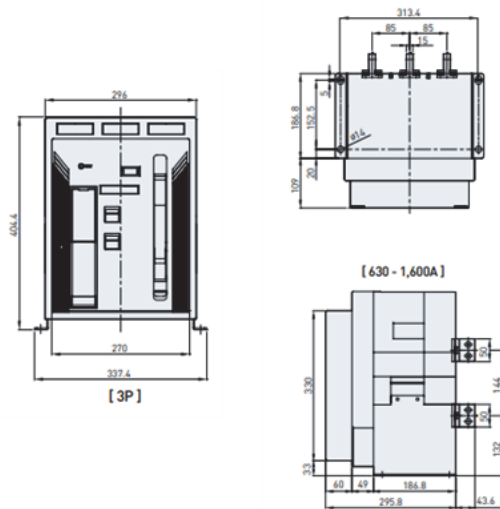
UAN(S) A06~16 for Emergency Diesel Generator Drawing
